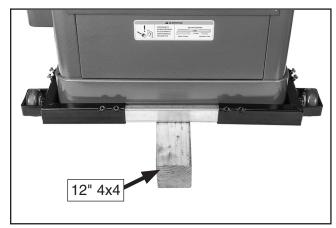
Remaining brackets and rail placed around back of machine, which is raised up with a wood block
